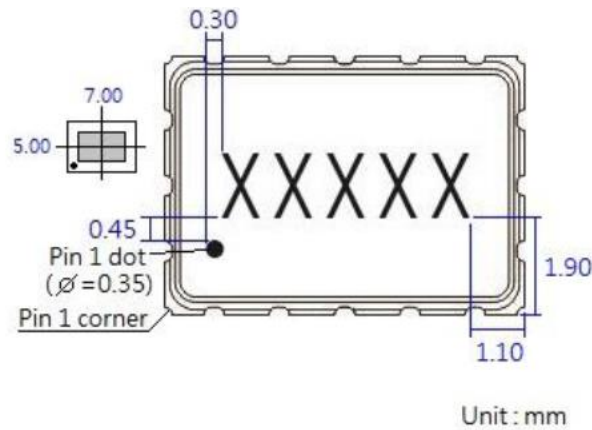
Standard Marking Dimensions for Ceramic Package (7.0 mm x 5.0 mm)
